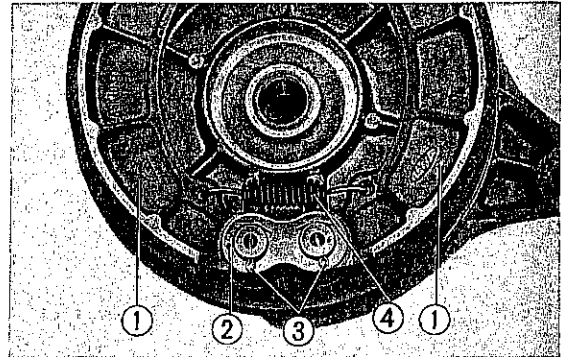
① Brake shoes ② Pin washer ③ Cotter pins ④ Brake shoe spring
